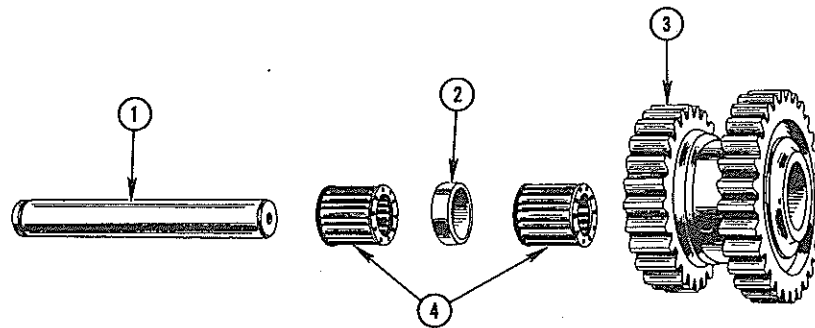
REVERSE IDLER SHAFT, EXPLODED
